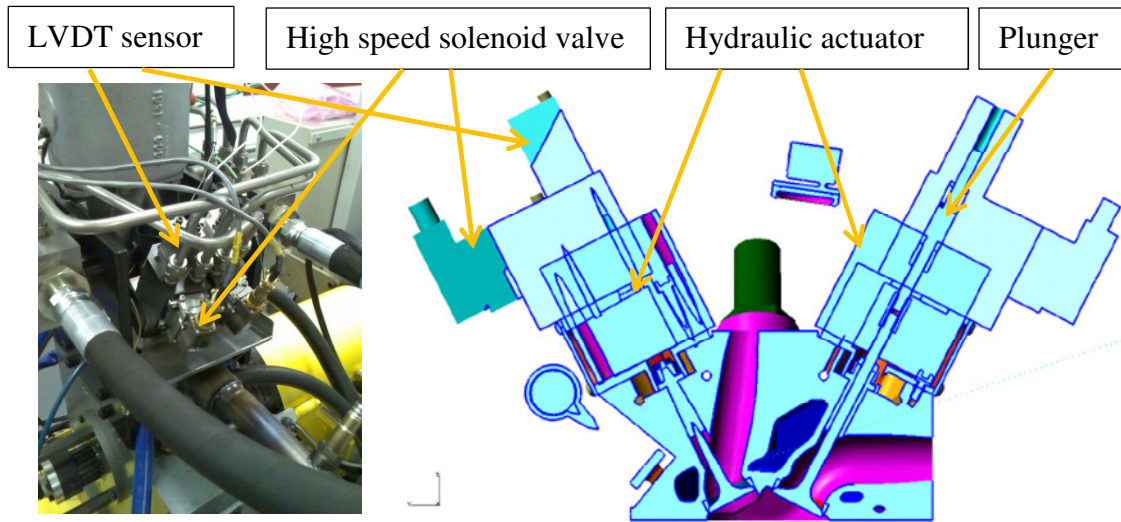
Electrohydraulic Valve Actuator and its Cross Section Drawing
